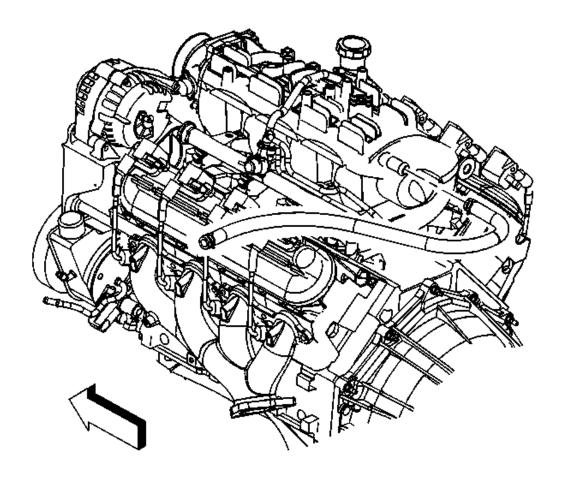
Disconnecting Vacuum Brake Booster Hose (4.8L, 5.3L, 6.0L) Courtesy of GENERAL MOTORS CORP.
